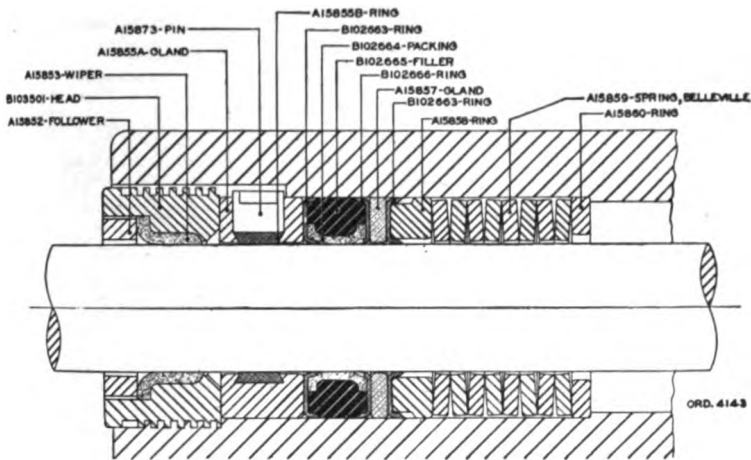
Recoil stuffing box assembled, sectioned view.
